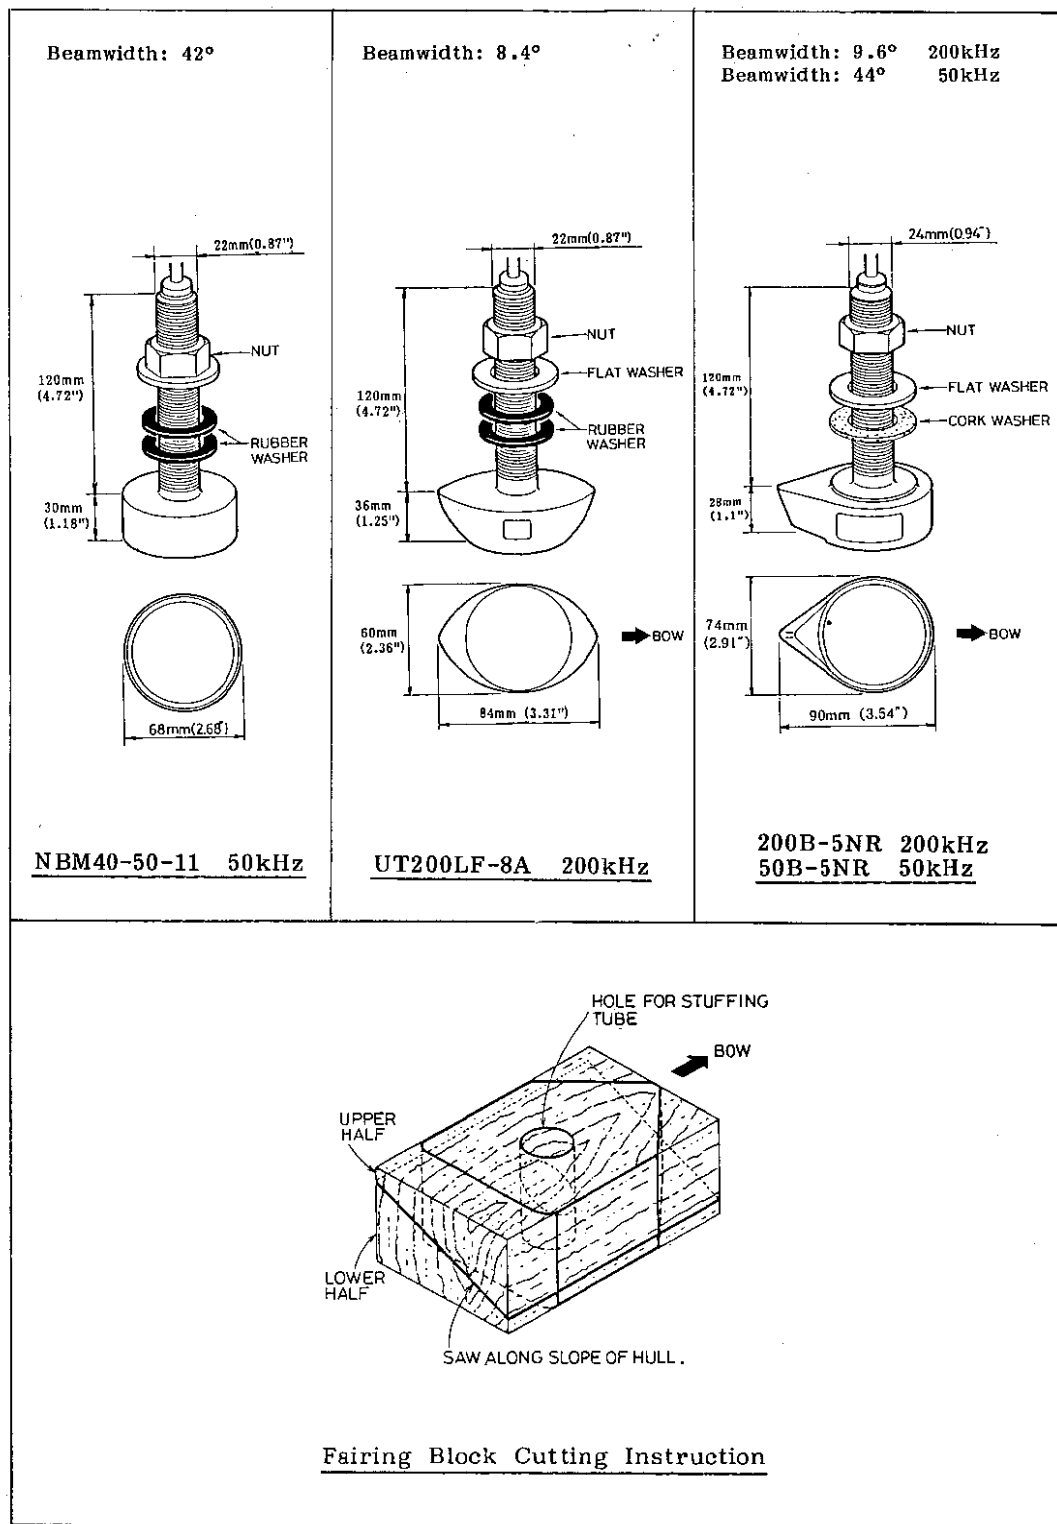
Inside-Hull and Through-Hull Transducer Outline Drawings/Fairing Block Cutting Instruction.
